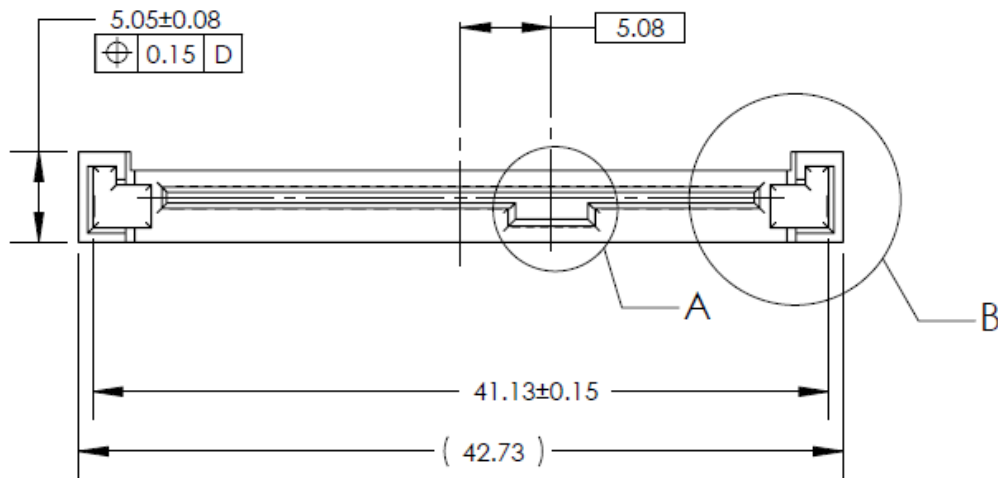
Connector Plug Mechanical Drawing – Bottom View (outside of enclosure)
